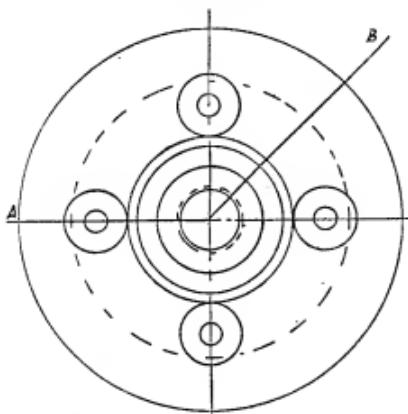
Rotary-valve housing and end cover (aluminium)
